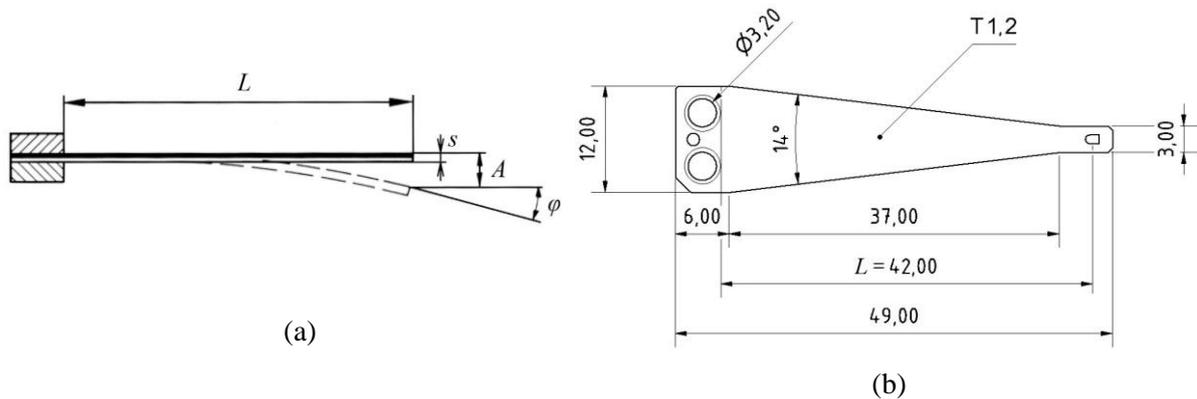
Deflection of straight thermostatic bimetal cantilever strip (a) and dimensions of the strip in trip unit (b)
